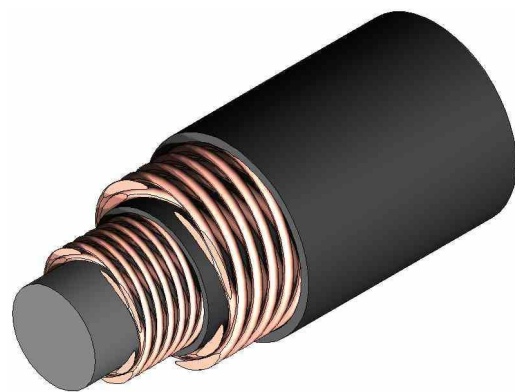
Structure of complete sensor cable with sensor coil and electrical shielding coil
